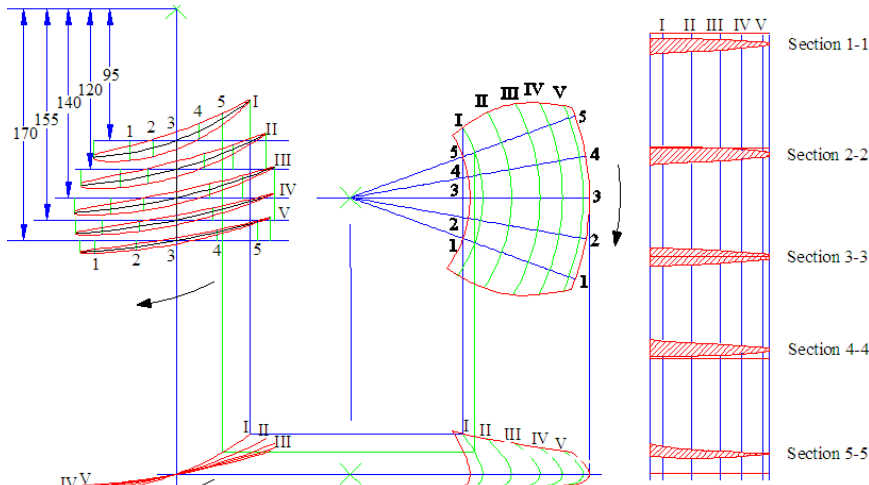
Two Dimensional View of Blade Profile for Impeller
